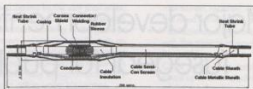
Premoulded straight joint for extruded cables with Cu or Al conductors
